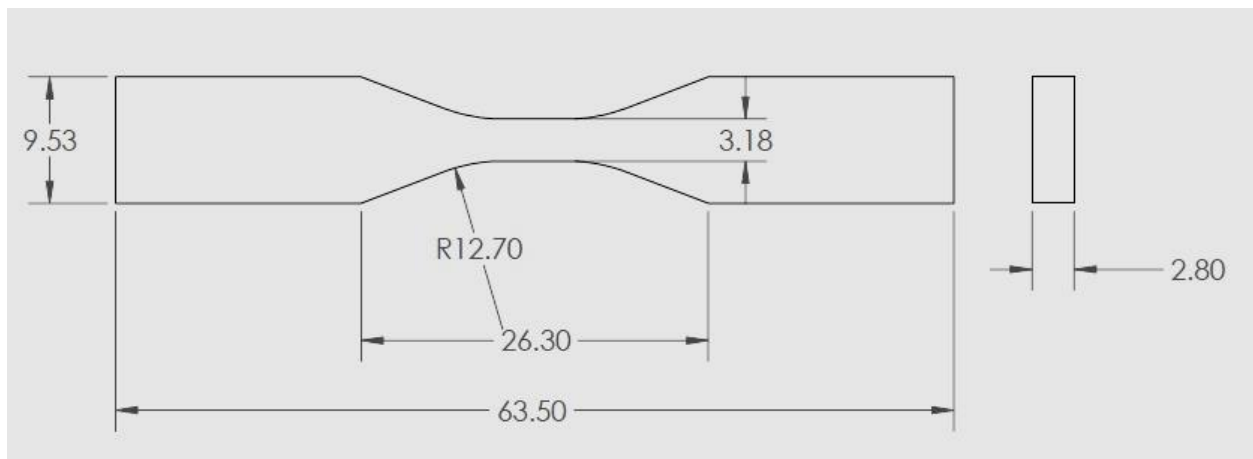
Dimensions for ASTM D638-10, Type 5. 2013
